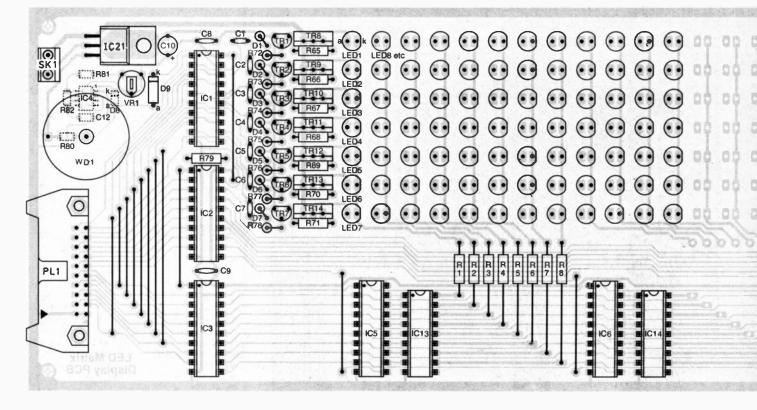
Printed circuit board component layout for the Display board. As the board is too large to be included fully, we are only able to show the two ends (see next page) of the board; the middle section is a repeat of the l.e.d. layout.
